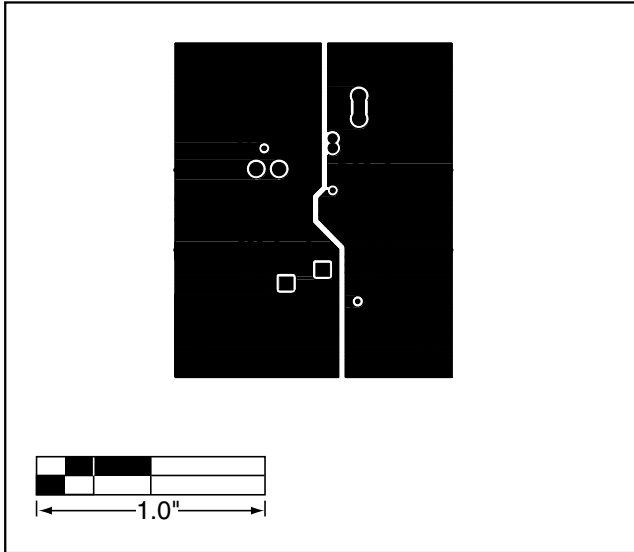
MAX2840 EV Kit PC Board Layout—Layer 2
